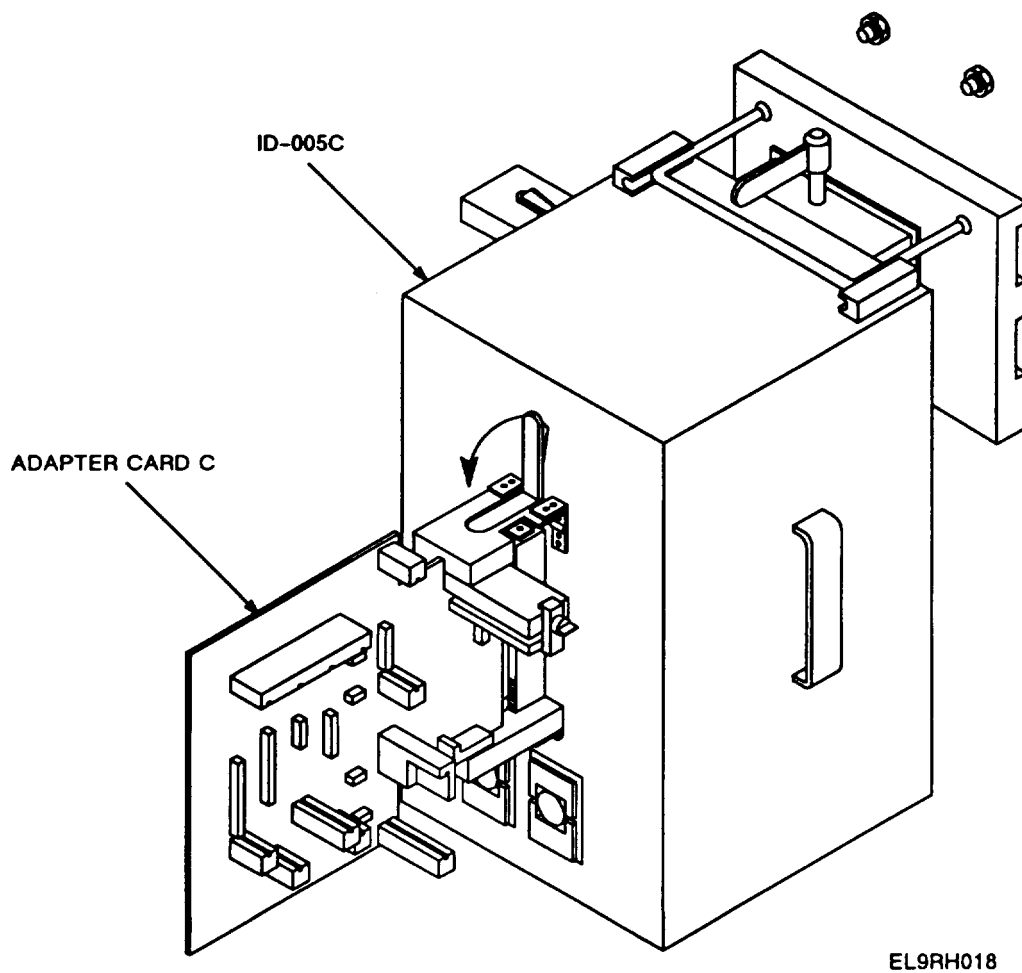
Installation of Adapter Card C for Power Supply-Module Assembly
